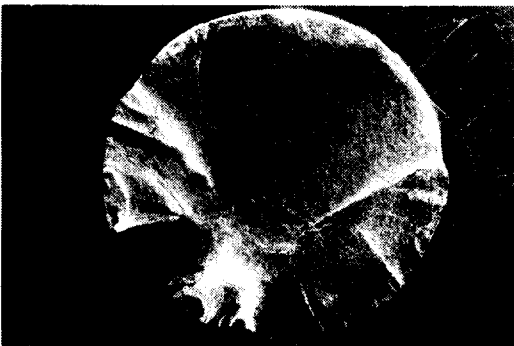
Macroscopic of surface fatigue fracture of T.M.C.P. steel(high stress level)
